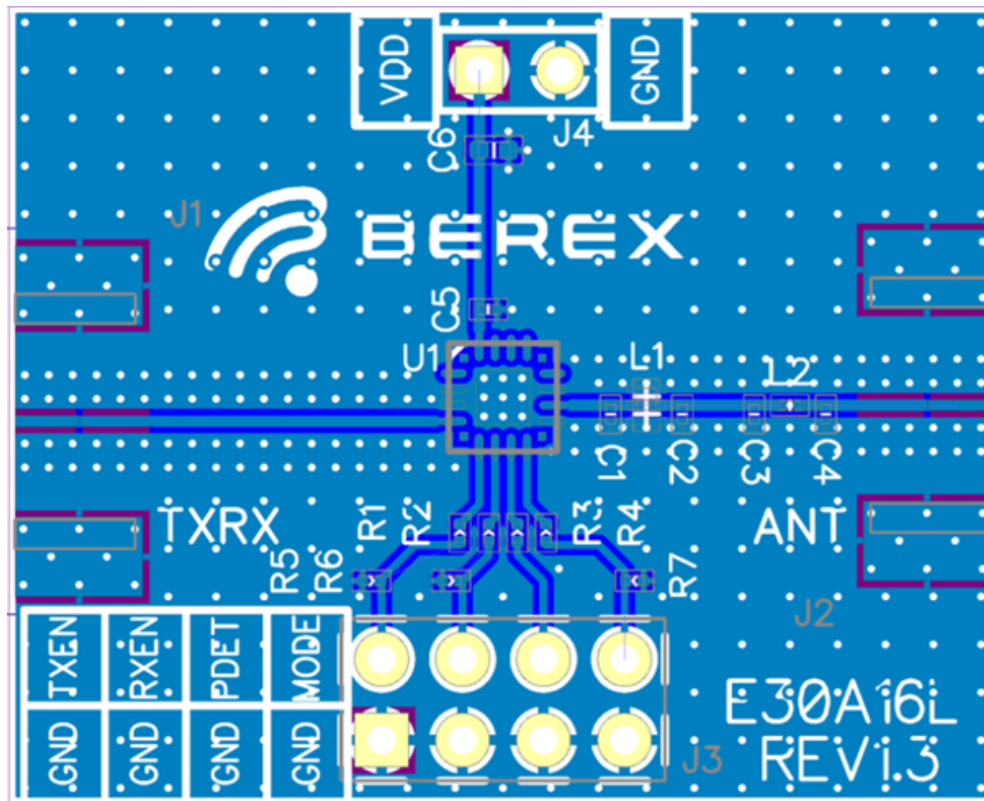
8TR8217 / 8TR8218 / 8TR8219 Evaluation Board PCB Layout
